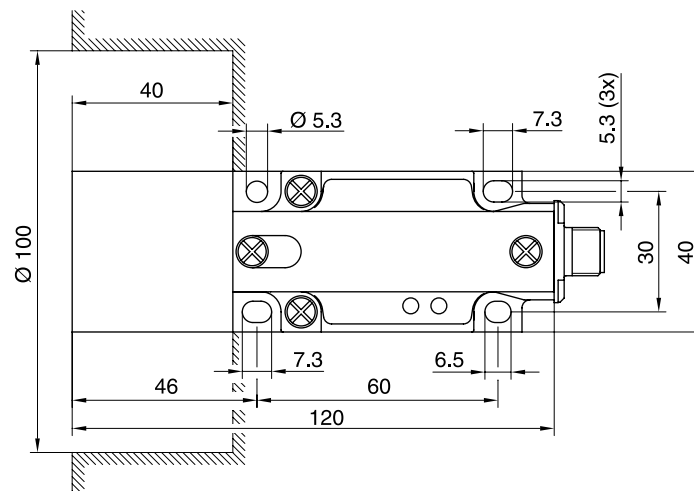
BIS L-400-043-001-02-S115 processor dimensions
